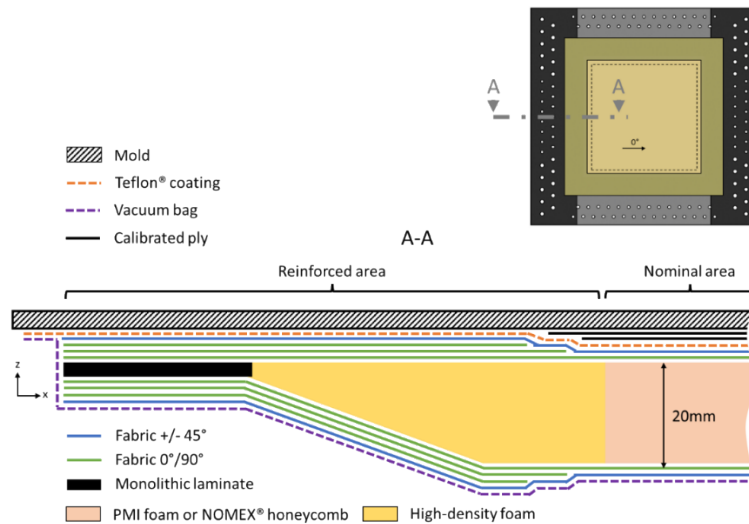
Cross-sectional drawing of specimens with the manufacturing process.
